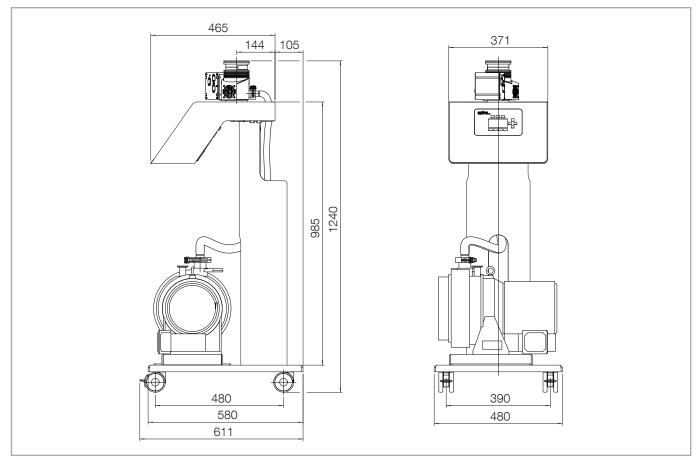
Dimensional drawing TURBOLAB 80 Cart, dimensions in mm
